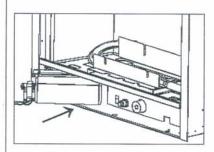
Insert blower assembly into the bottom space of burner pan according to Figure 8. Pay attention not to touch wires inside.
